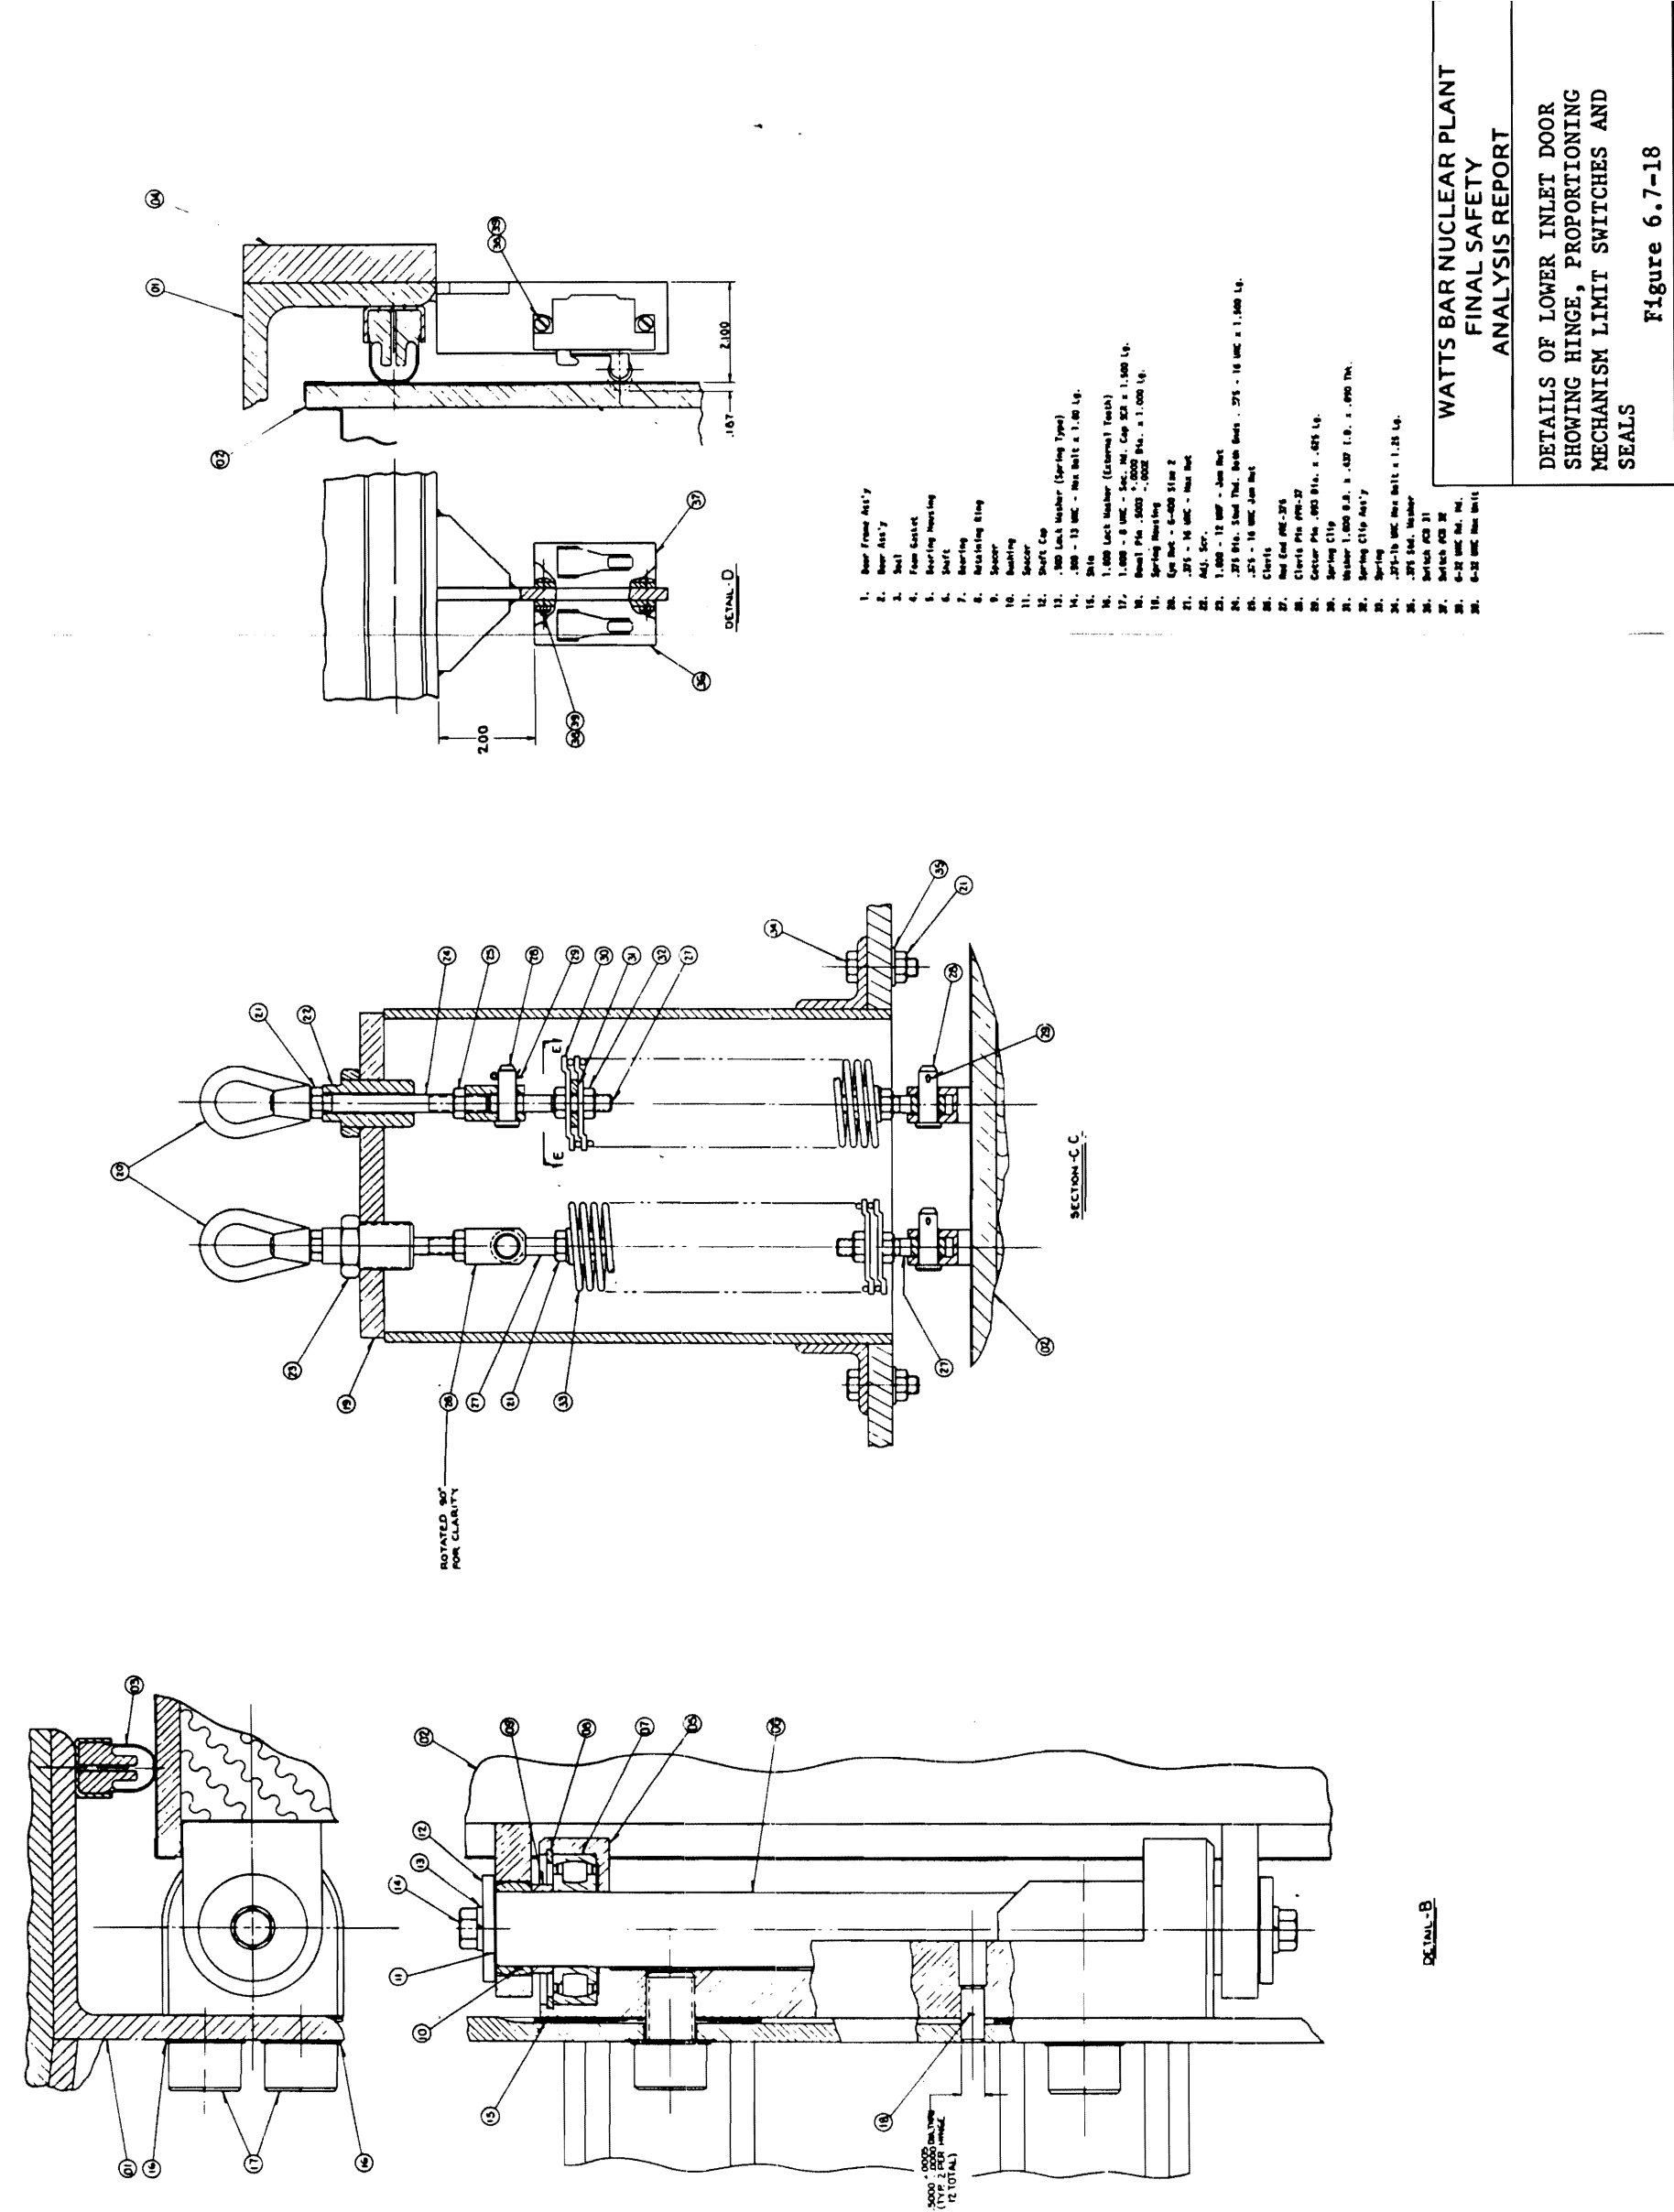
Details of Lower Inlet Door Showing Hinge, Proportioning Mechanism Limit Switches and Seals
